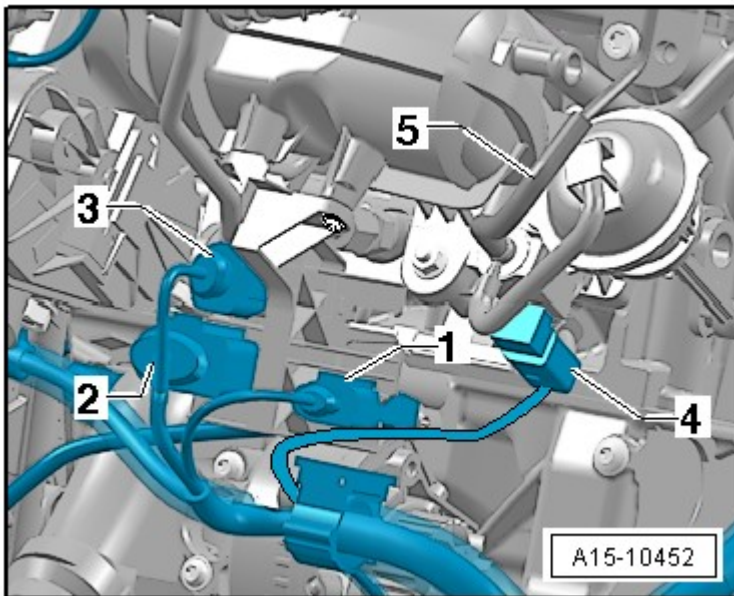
Identifying EVAP Filter Vacuum Hose, Electrical Connectors And Electrical Cable
